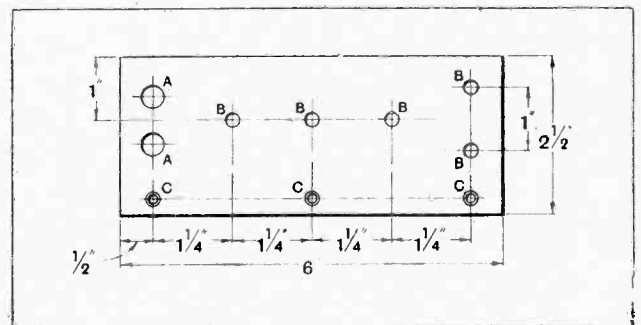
Showing the dimensions of the terminal strip. A=3/8in. dia. holes; B=7/32in. dia. holes; C=1/8in. dia. holes, countersunk for No. 4 wood screws.
